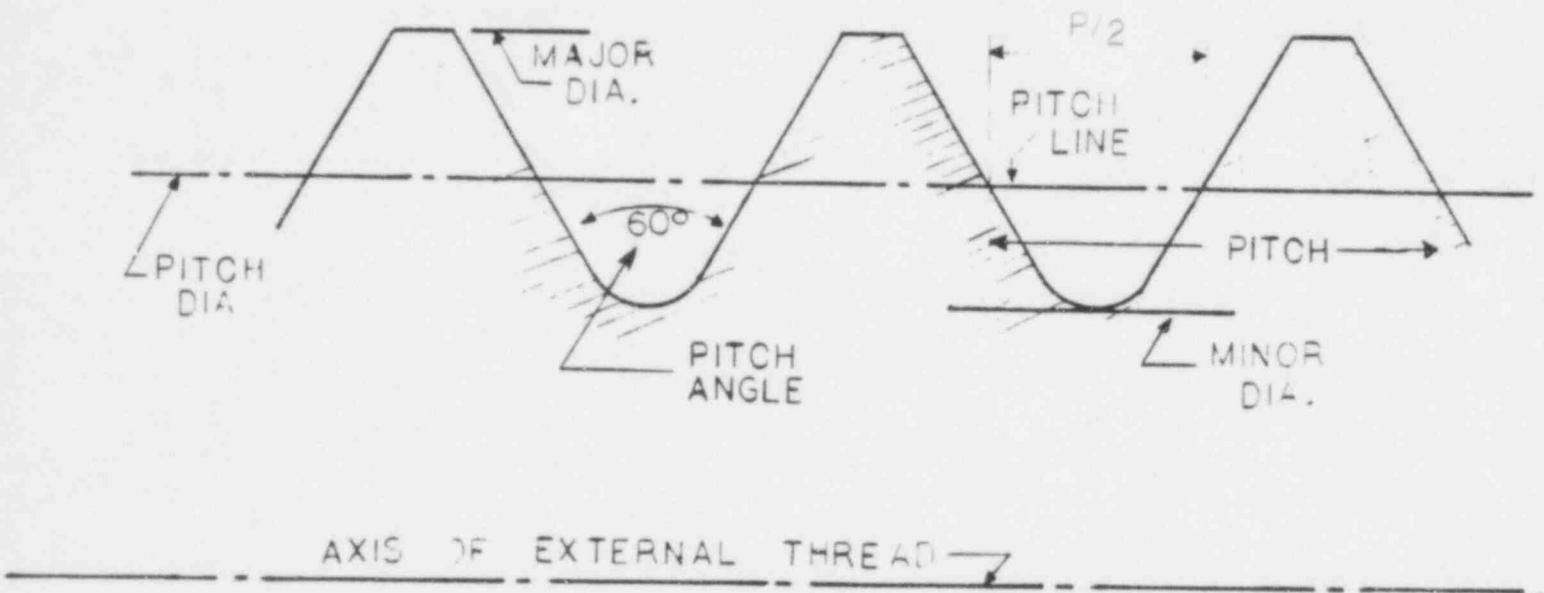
EXTERNAL SCREW THREAD DESIGN FORM
